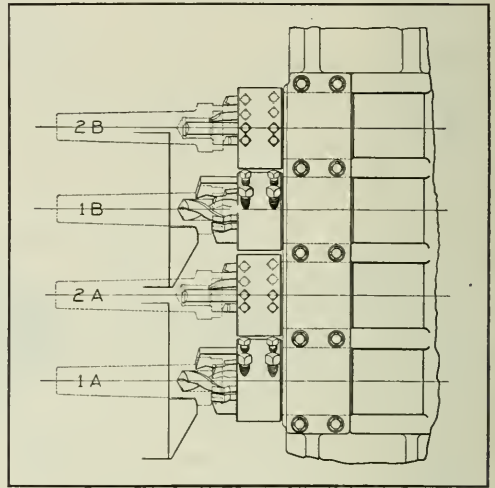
Machining a Clutch Shaft on a Double-spindle Production Lathe
